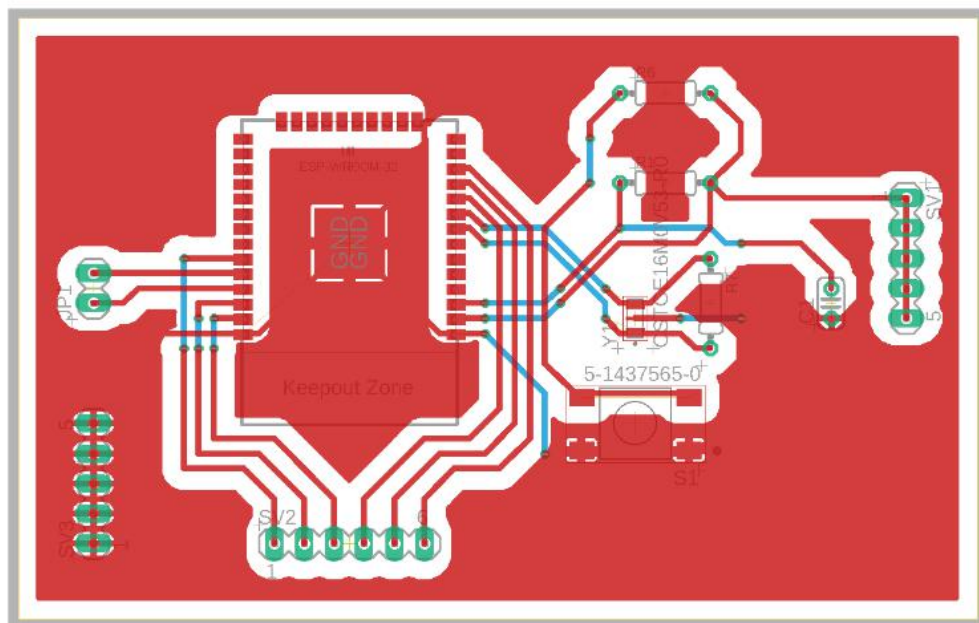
Body Part PCB Design (ESP-WROOM-32)
